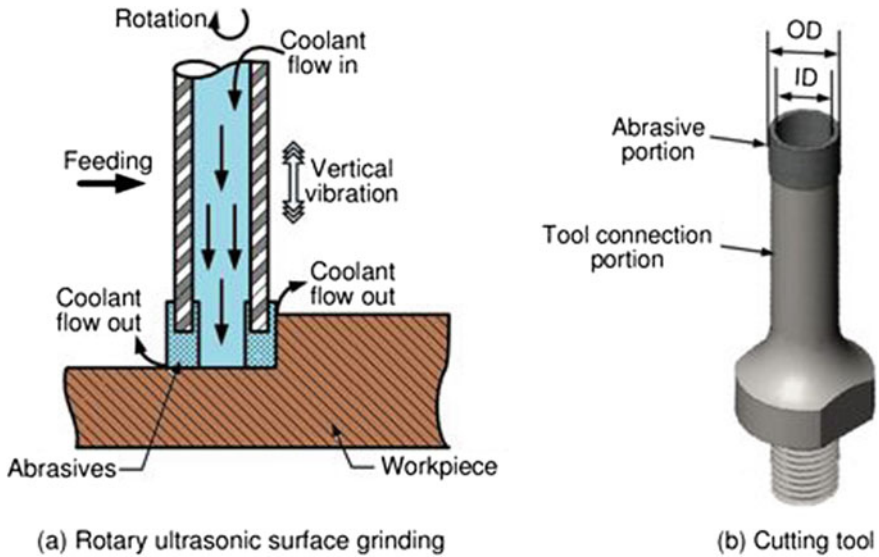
Schematic of Rotary Ultrasonic Machining (RUM) and cutting tool
